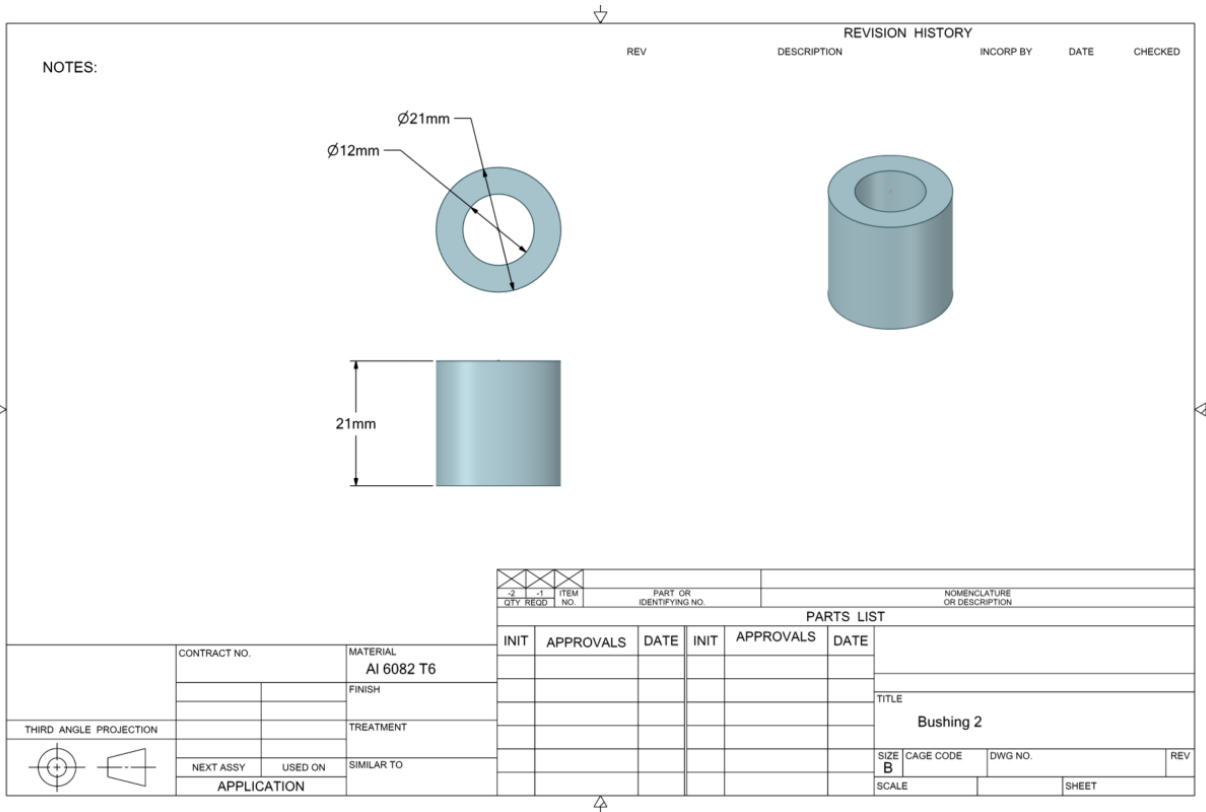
Aluminium 6082 T6 Bushing 2 (Bolt Sleeve) Drawing
